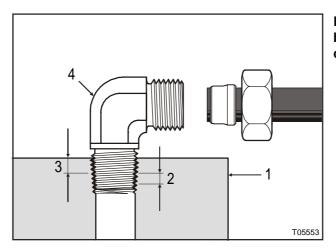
Elbow fitting assembled to pipe port, aligned to receive incoming tube
